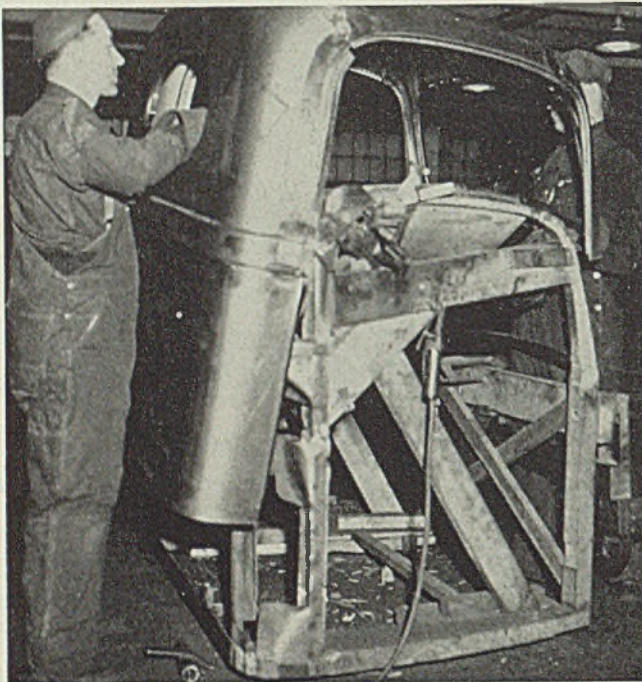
(Top)—Major framing fixture in which most of the welding of panel sections and framework is done
